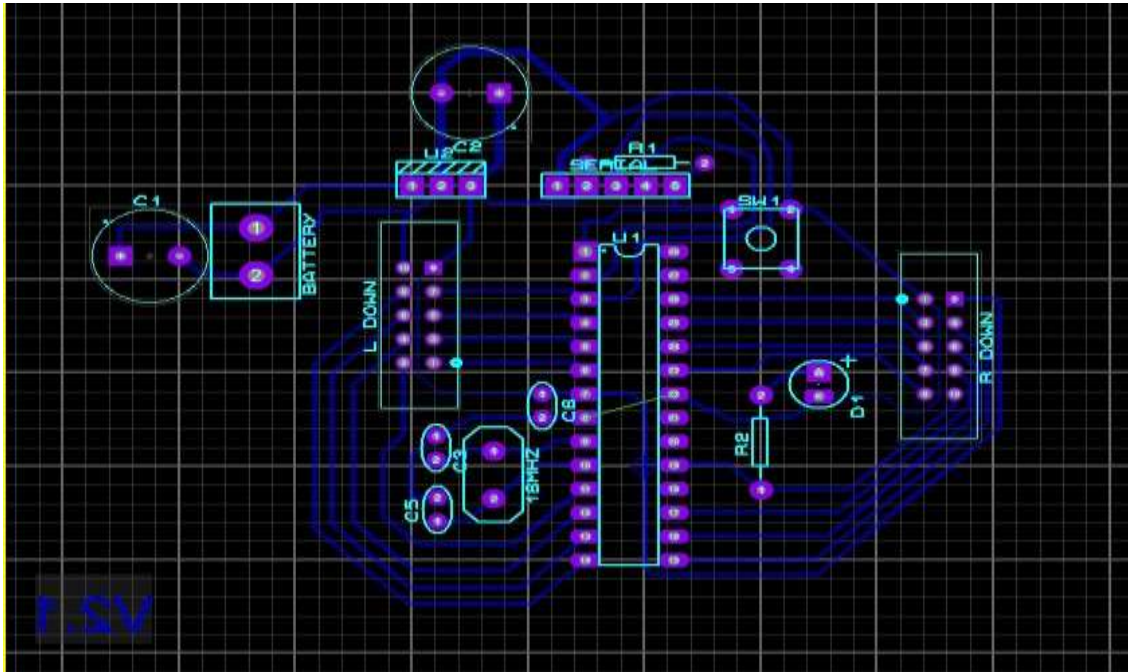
PCB Layout of Motor controller Iteration-2
